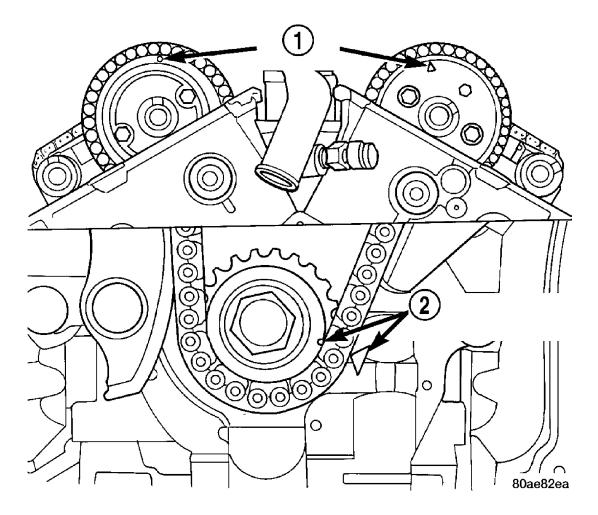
Checking Timing Mark Alignment Courtesy of CHRYSLER LLC
